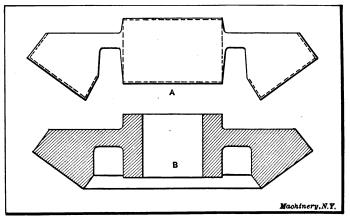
Templet with Shrinkage, Dratt and Finish Allowances added, used in turning out the Impression in a Die for a Bevel Gear Blank. B shows the Finished Gear Forging after being machined
